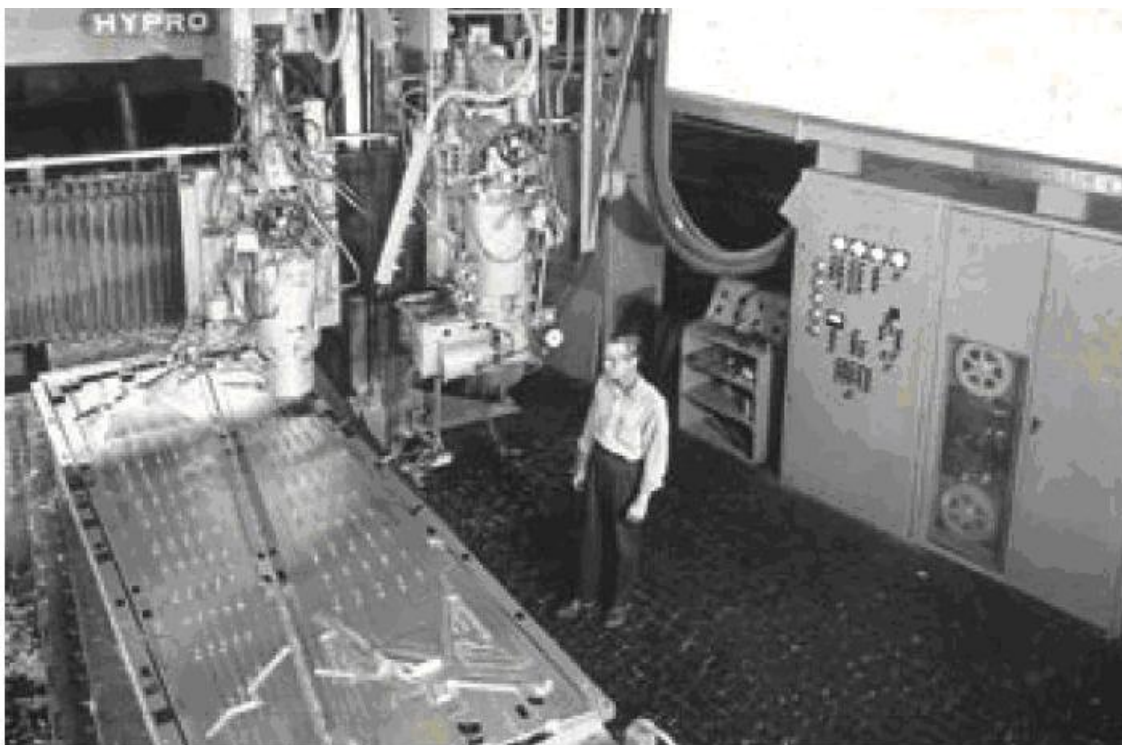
(b) Milling a mould for skin panels for a US airforce jet in the '50s
